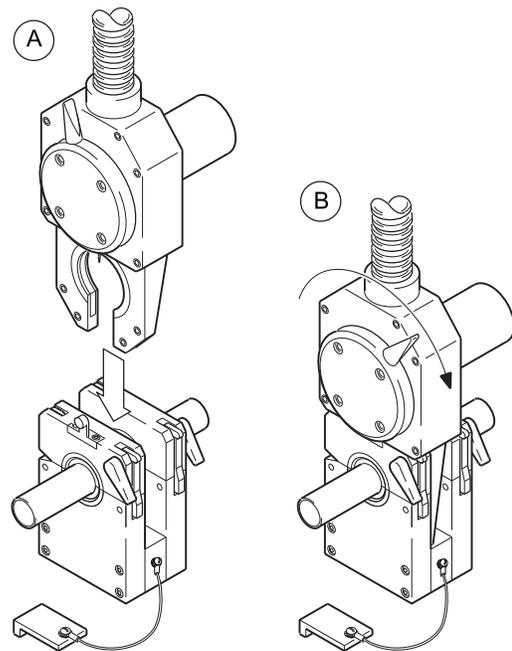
Mating the Weld Head to the Fixture Block
